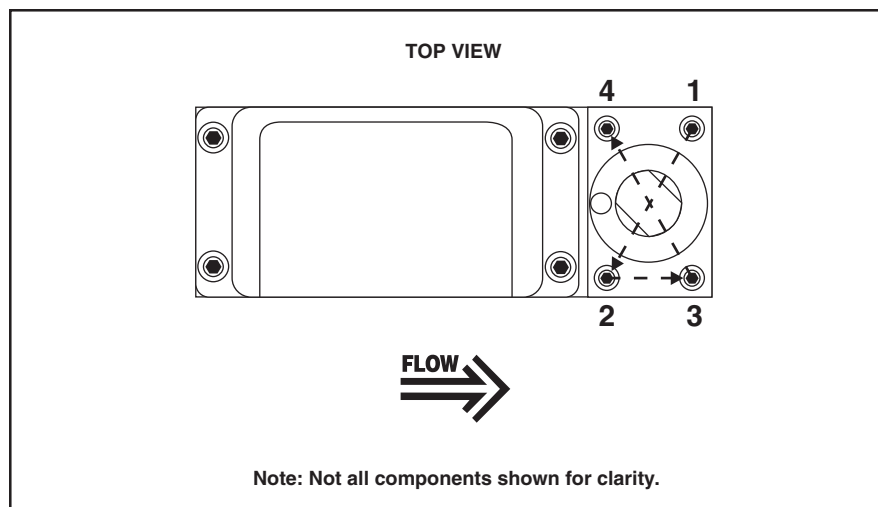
Torque Sequence for the Valve Retainer Plate (Controller)
